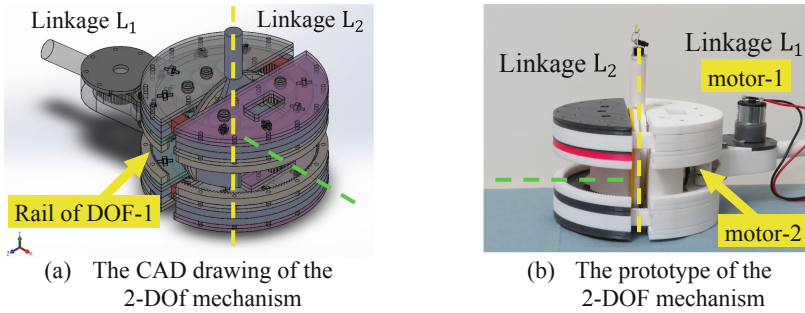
The CAD drawing and the prototype of the 2-DOF mechanism
